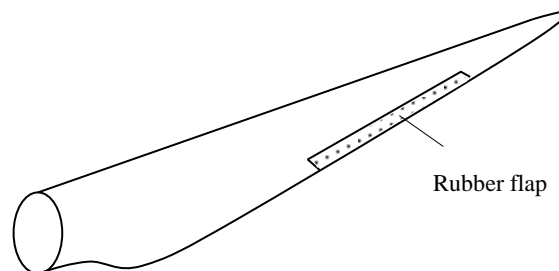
Wind turbine blade equipped with a rubber flap system, installed on the blade trailing edge.
